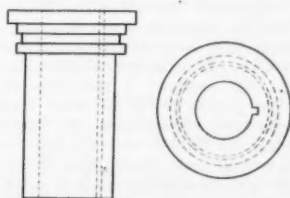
BECAUSE OF UNDERCUTS, IT WOULD BE IMPOSSIBLE TO FORM THIS PART TO FINAL SHAPE
